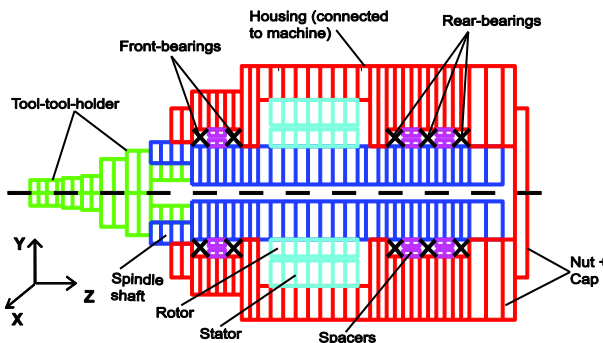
Detailed finite element model of the spindle assembly including holder and tool [1]
